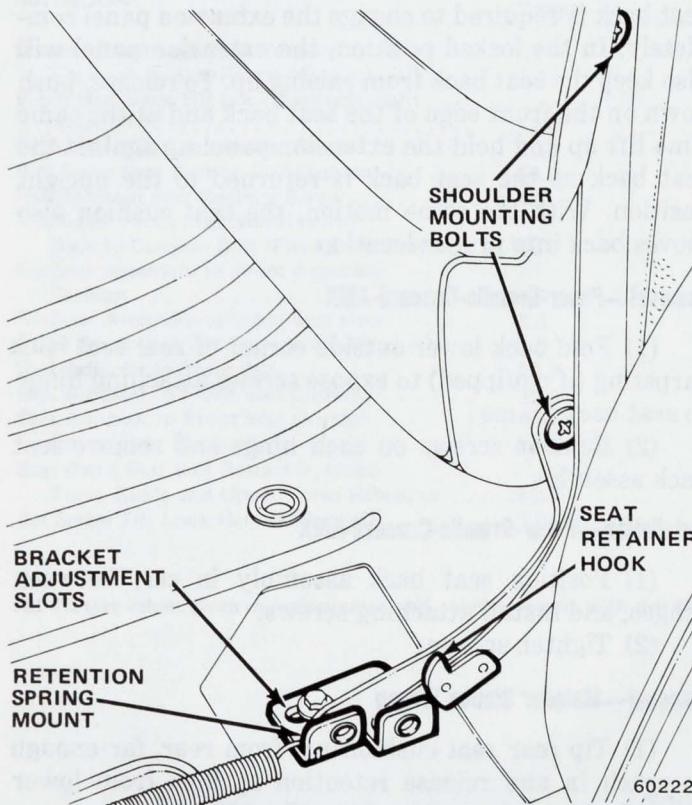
M-18 Seat Back Side Arm Bracket—Matador Station Wagon
